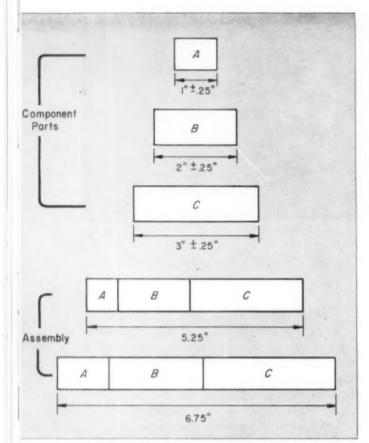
Example of assigning of part and assembly tolerances by conventional methods. Resulting assemblies represent minimum and maximum extremes.
